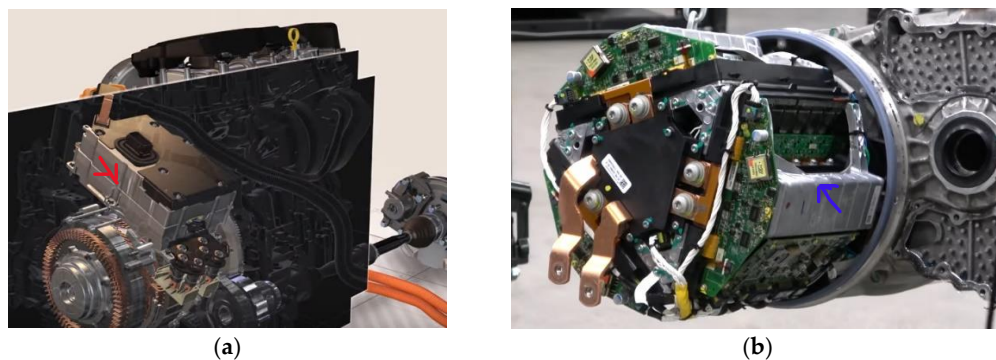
Motor and power electronics integration in recent vehicles; (a) 2016 Chevy Volt radially mounted drive (red arrow) [50] (b) Tesla Model S triangular frame axial endplate mounted electronic drive (blue arrow) [14].
